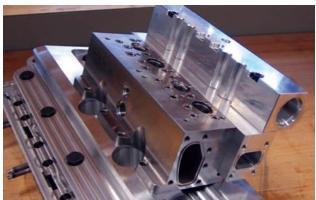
Test Fixture for Fully Flexible VVA Concept
